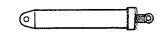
PLATFORM EXTENSION CYLINDER ASSEMBLY (HYDRAULICALLY EXTENDED DECK OPTION) (STANDARD PARTS) .
